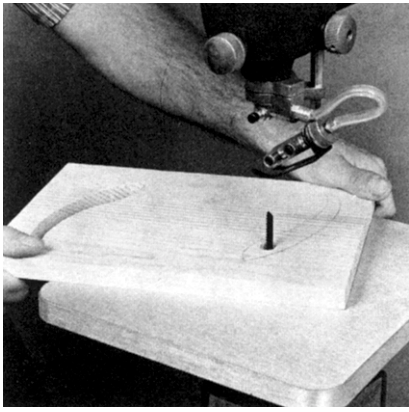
You can use the sabre saw setup when doing piercing on heavy stock.
